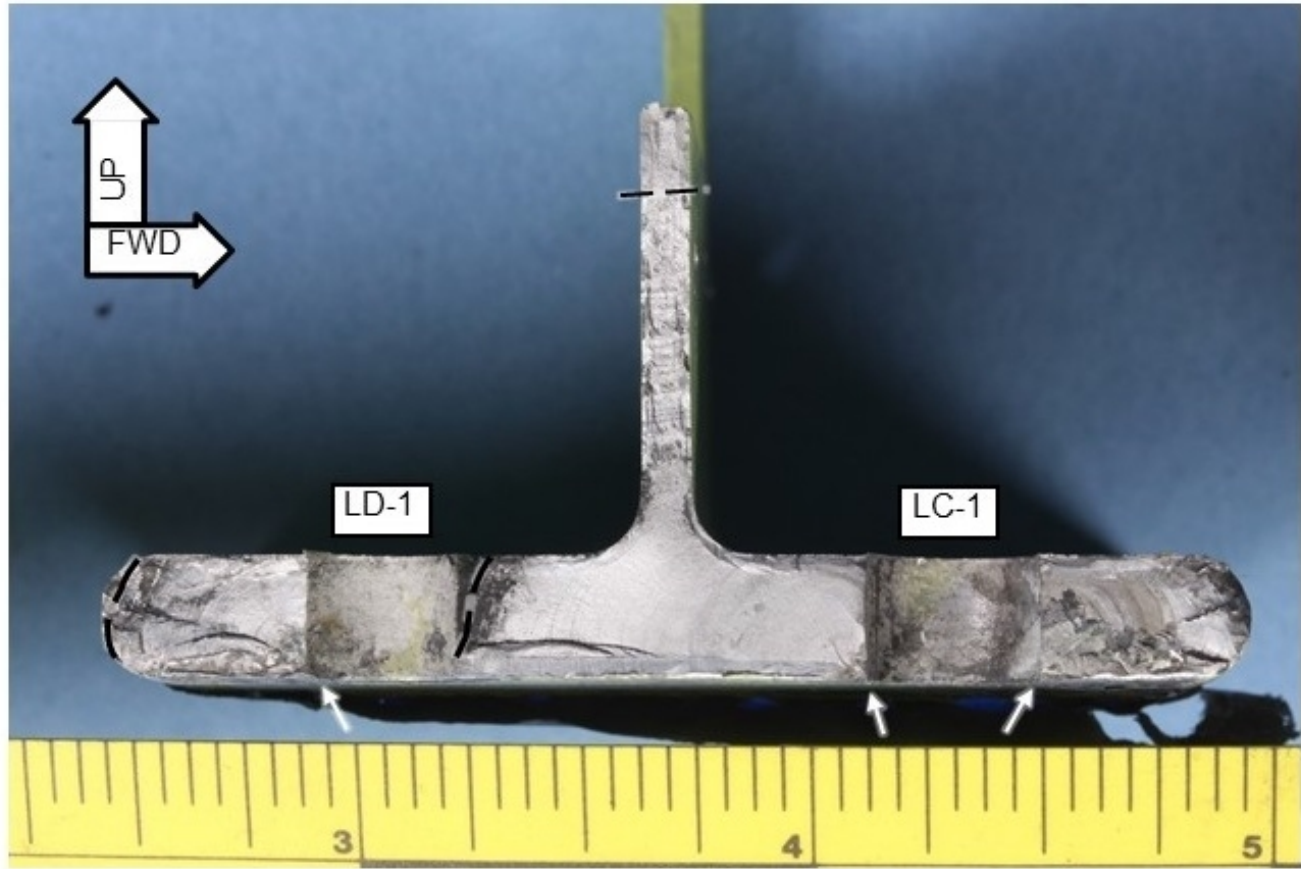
Close view of the fracture surfaces in the left-wing main spar lower cap. Unlabeled arrows indicate fatigue origin areas and dashed lines indicate approximate fatigue boundaries
